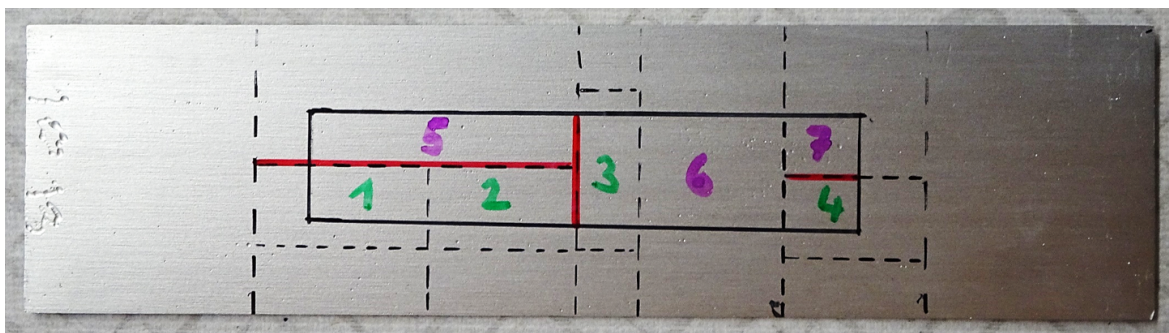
Mini-size plate consisting of a cladded stainless steel foil with W coating. The position of the foil (black line) and the sectioning scheme (dashed lines) is drawn onto the surface. Sample pieces numbered 1–4 are used for the cross sections (red) and the piece numbered 5 for cladding removal.
